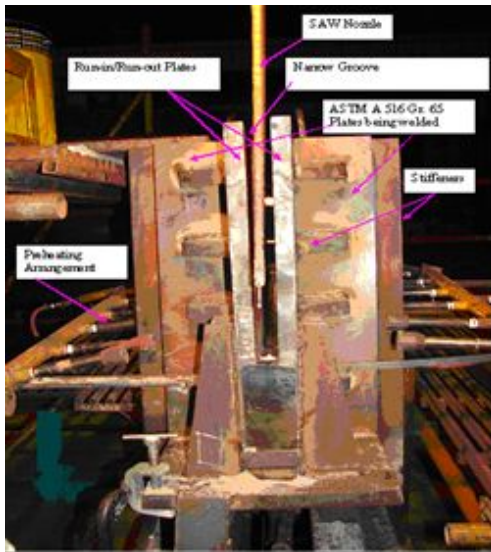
SAW Set-up for NGW of 800 mm thick welds at L&T, Hazira
